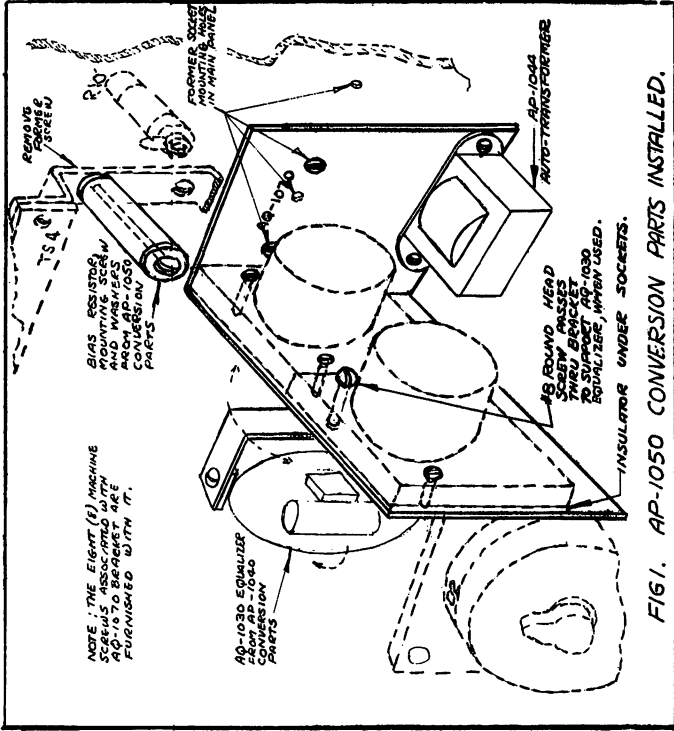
AP-1050 CONVERSION PARTS INSTALLED.
